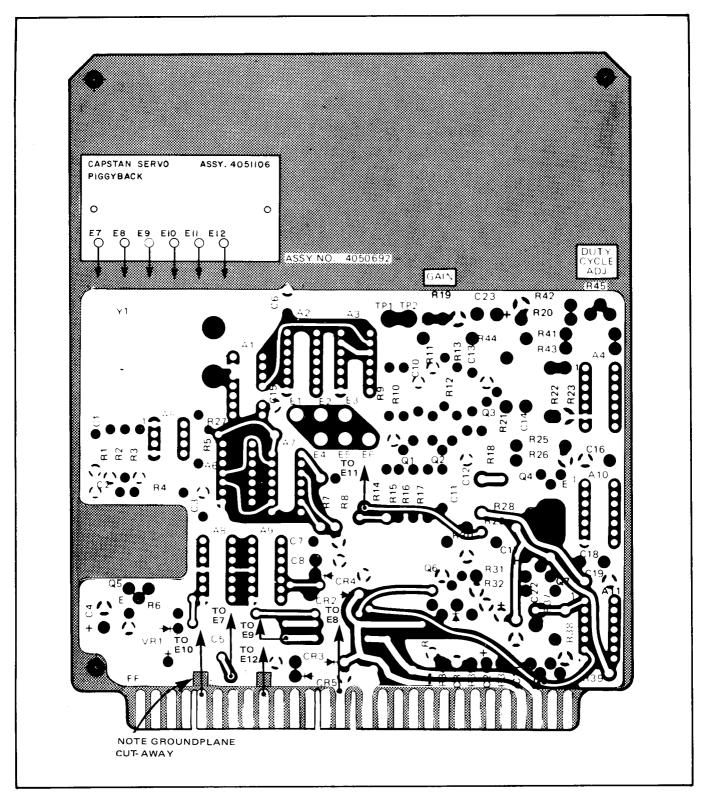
Capstan Servo Piggyback Soldering Guide
